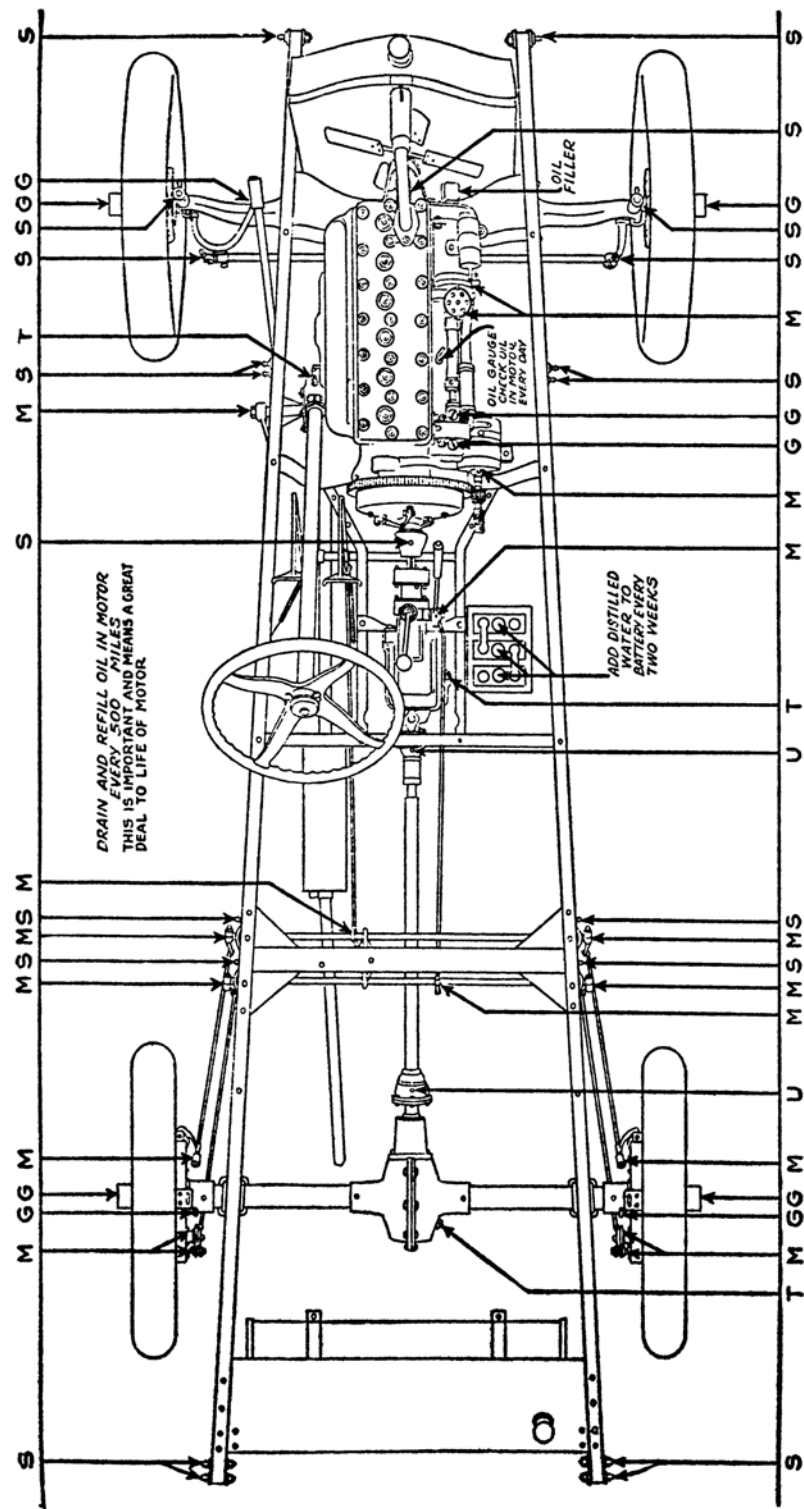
Lubrication Chart (Two Wheel Brakes)
